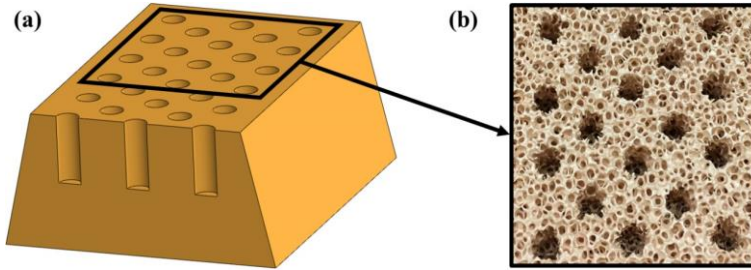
Detail view of a RPC brick from cavity #3 showing the partially implemented third-scale porosity. (a) is a section view of the brick as designed with CAD, while (b) is a photograph showing a section of a newly manufactured brick from the top.
